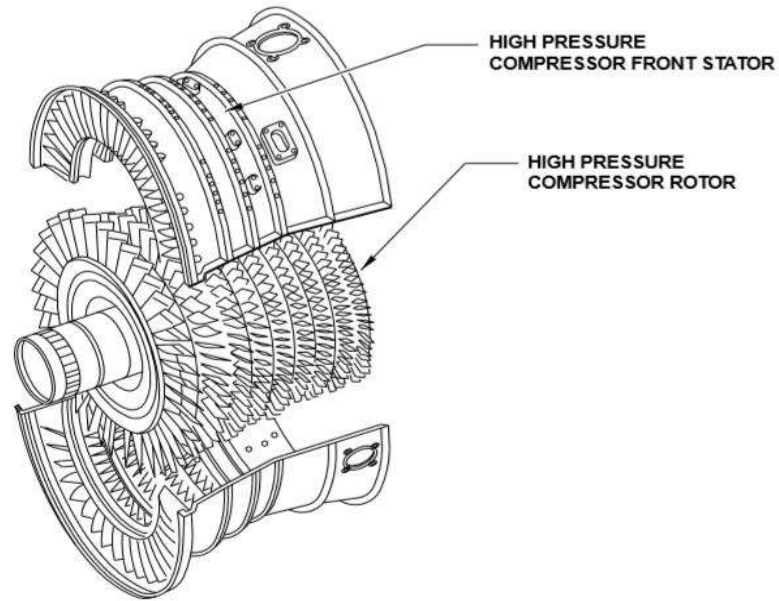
CFM56-5B HPC Module Exploded View [5]
